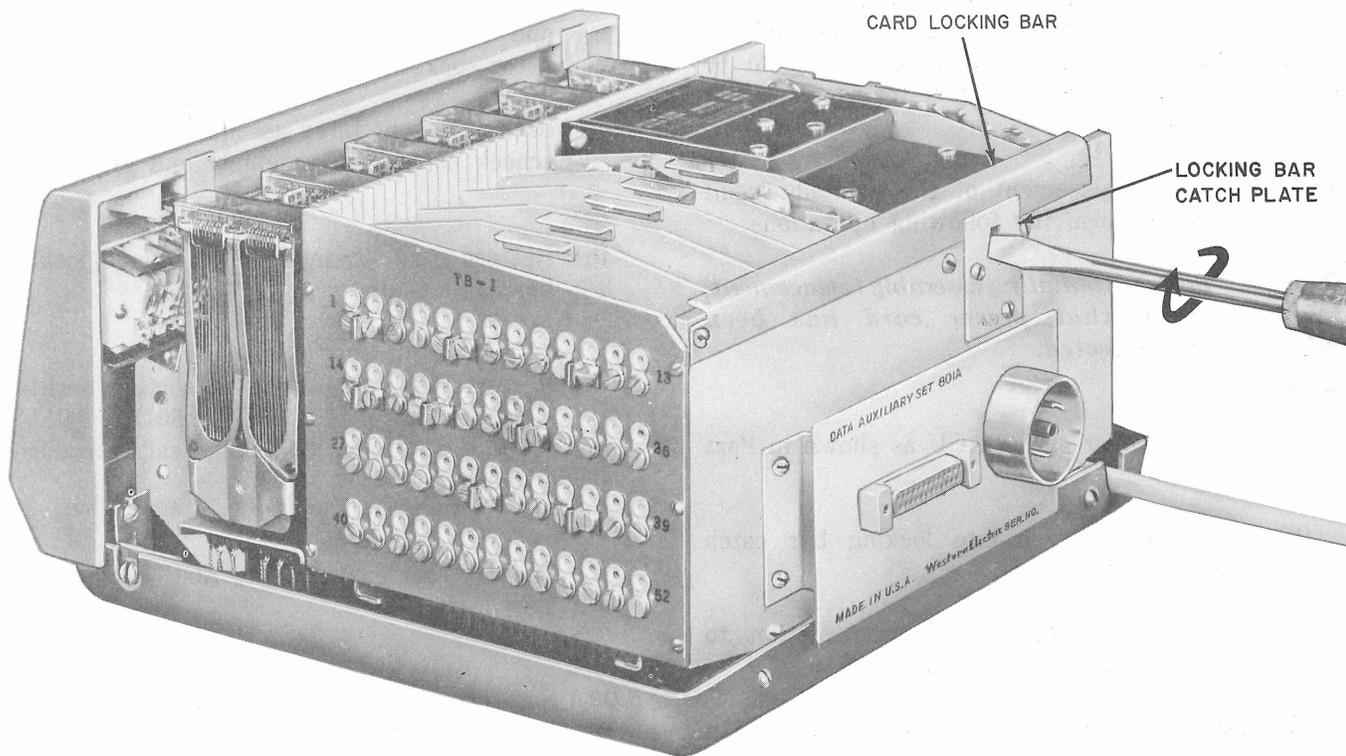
Data Auxiliary Set 801A-Type, Cover Removed for Printed Circuit Board Replacement
